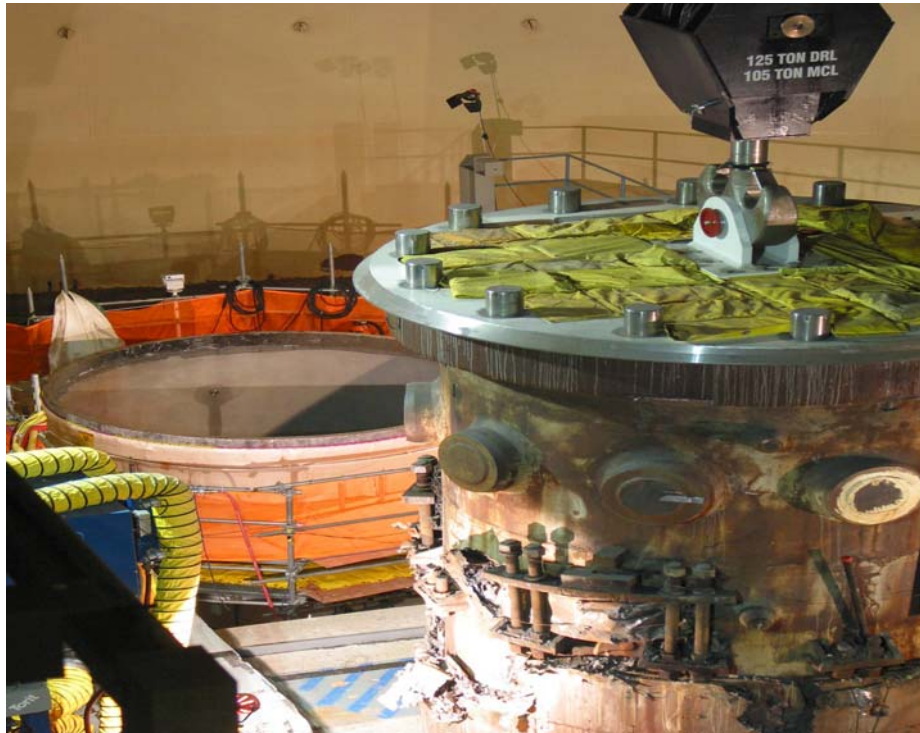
Reactor vessel nozzles capped by welding and epoxy
